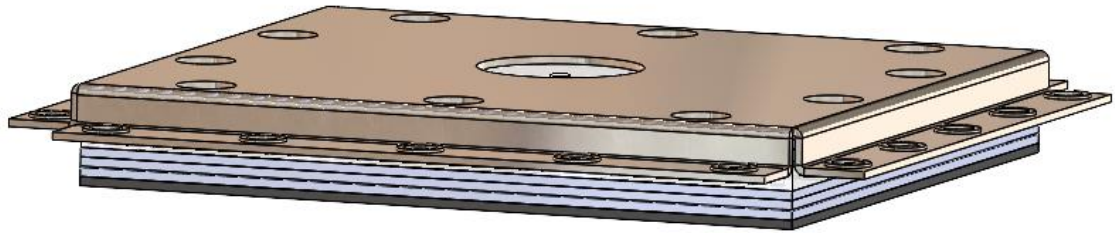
Test assembly of PEMFC stack with end parts and one complete cell
